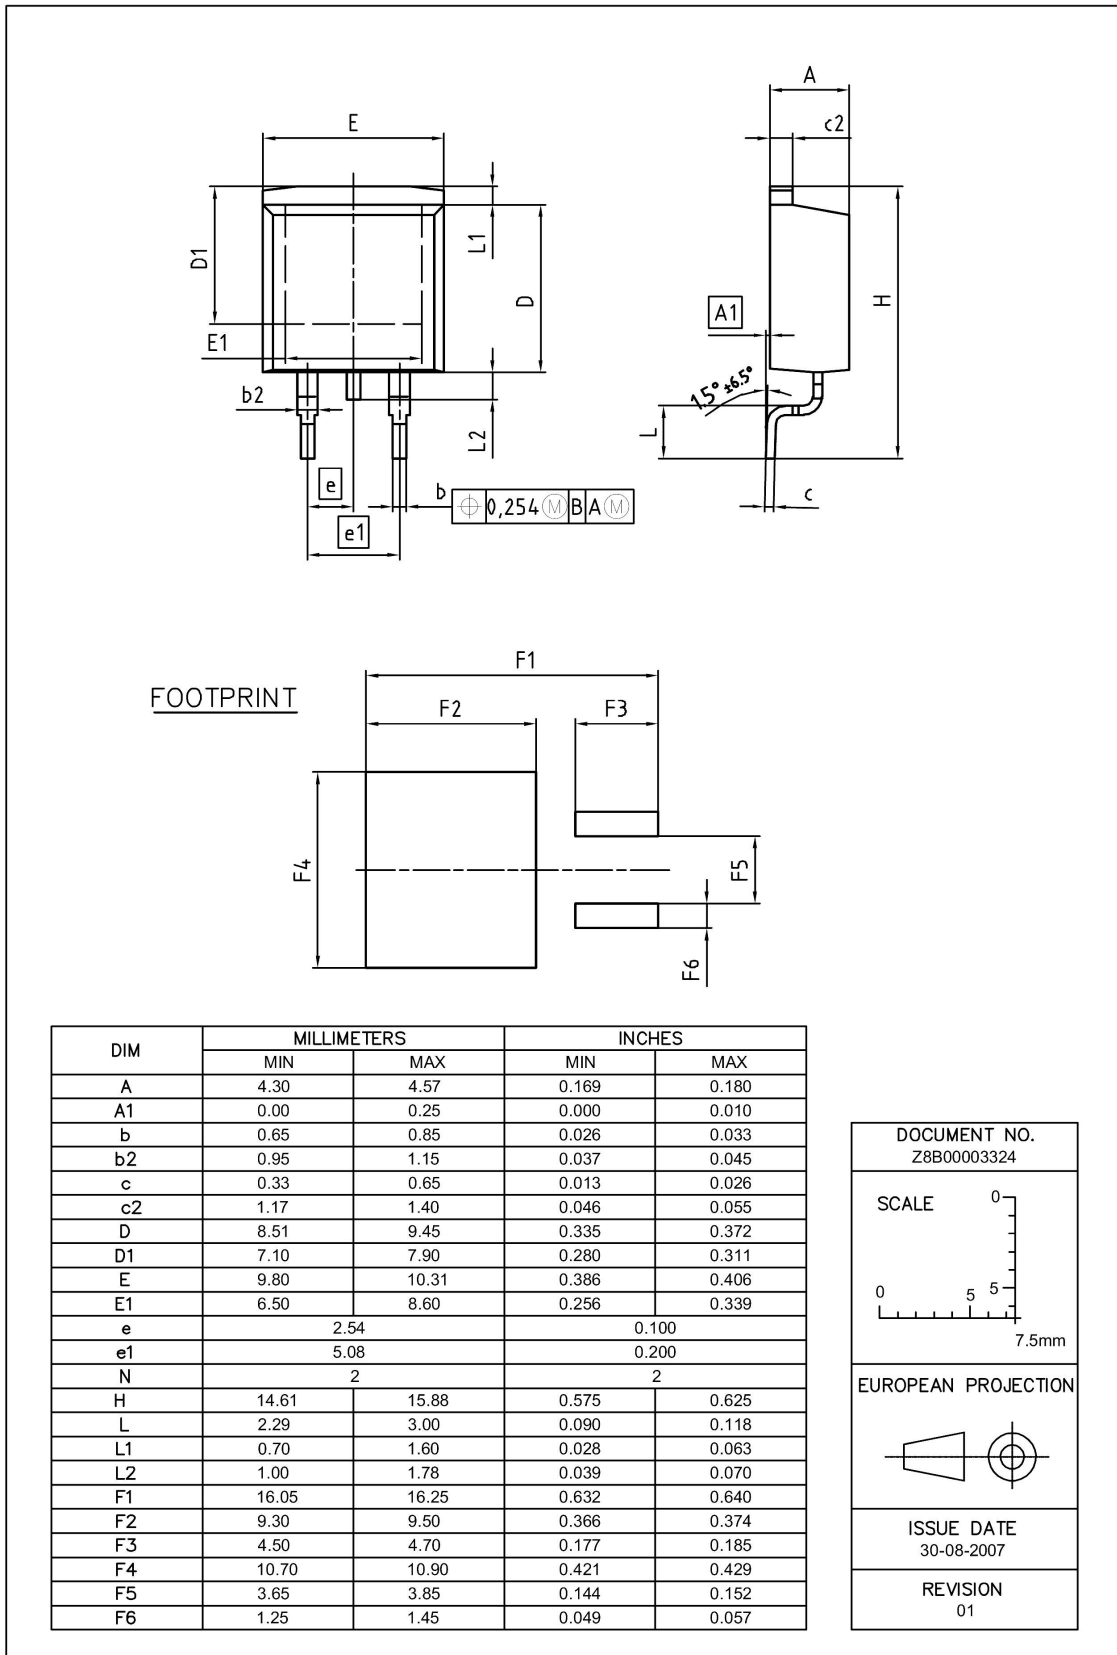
Outline PG-TO 263, dimensions in mm/inches
